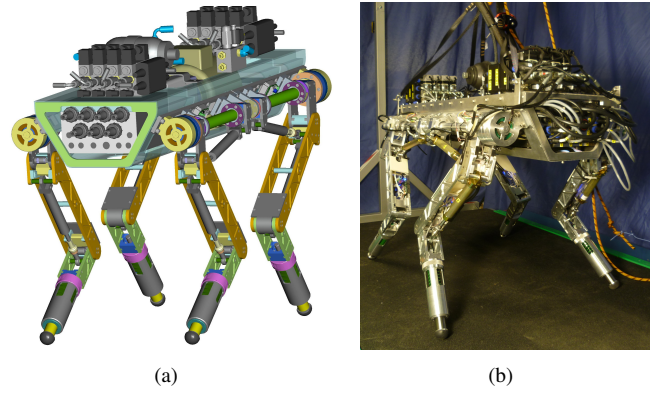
The hydraulically and electrically actuated quadruped robot HyQ: (a) CAD model and (b) picture with robot standing on treadmill [16].
